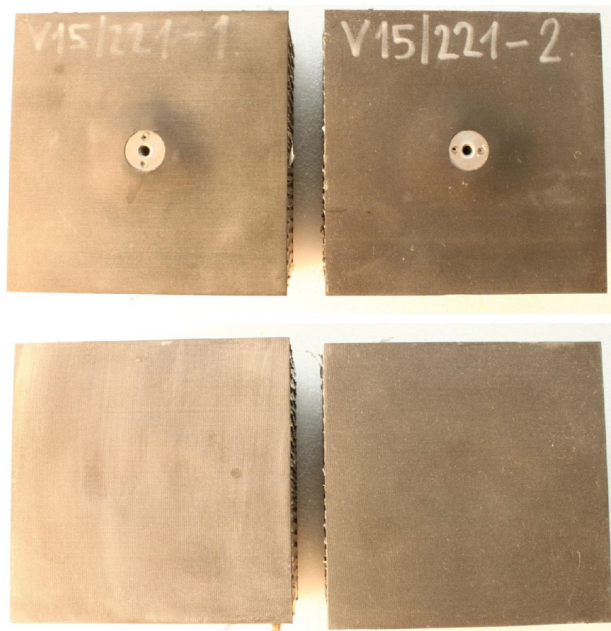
Two examples of used test specimens after the test - bottom and upper side is shown
